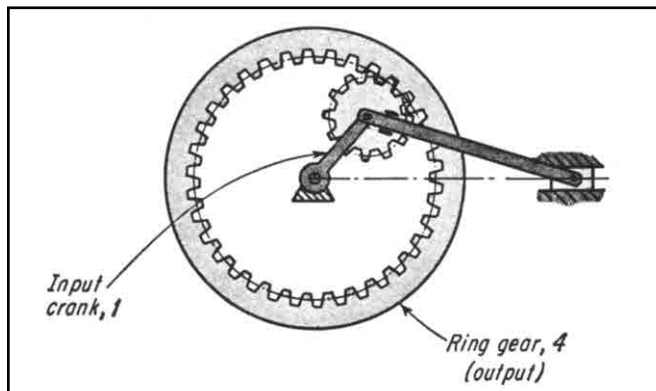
A ring-gear and slider mechanism. The ring gear is the output and it replaces the center gear in Fig. 1.
